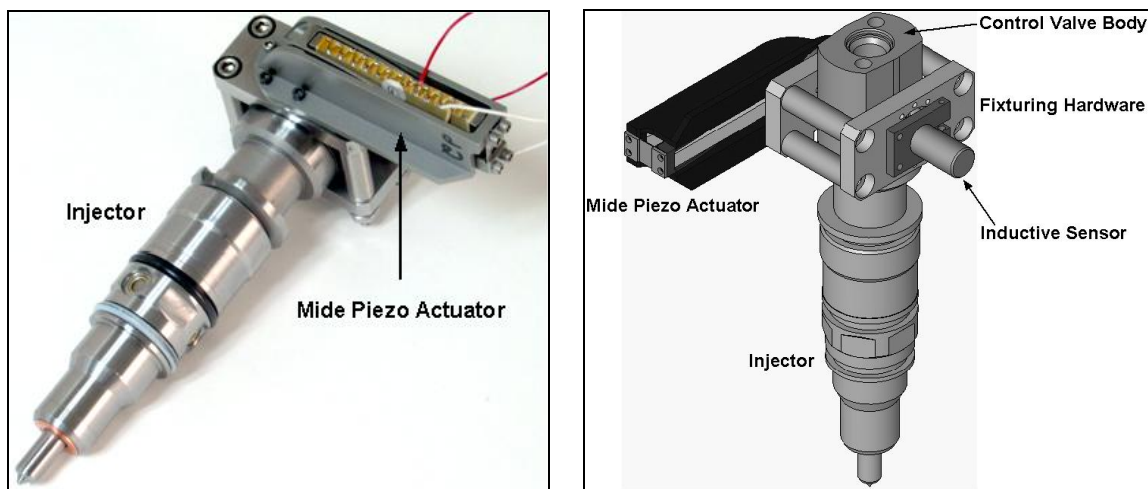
Photo (left) and rendering (right) of the commercial unit injector retrofitted for spool valve control with Midé's gained piezoelectric actuator.
